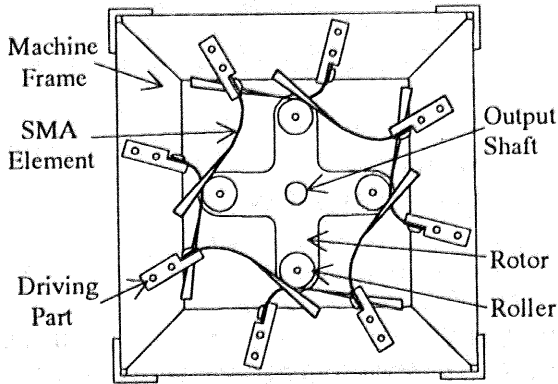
Schematic Illustration of Driving Parts and Rotary parts(Top View)
